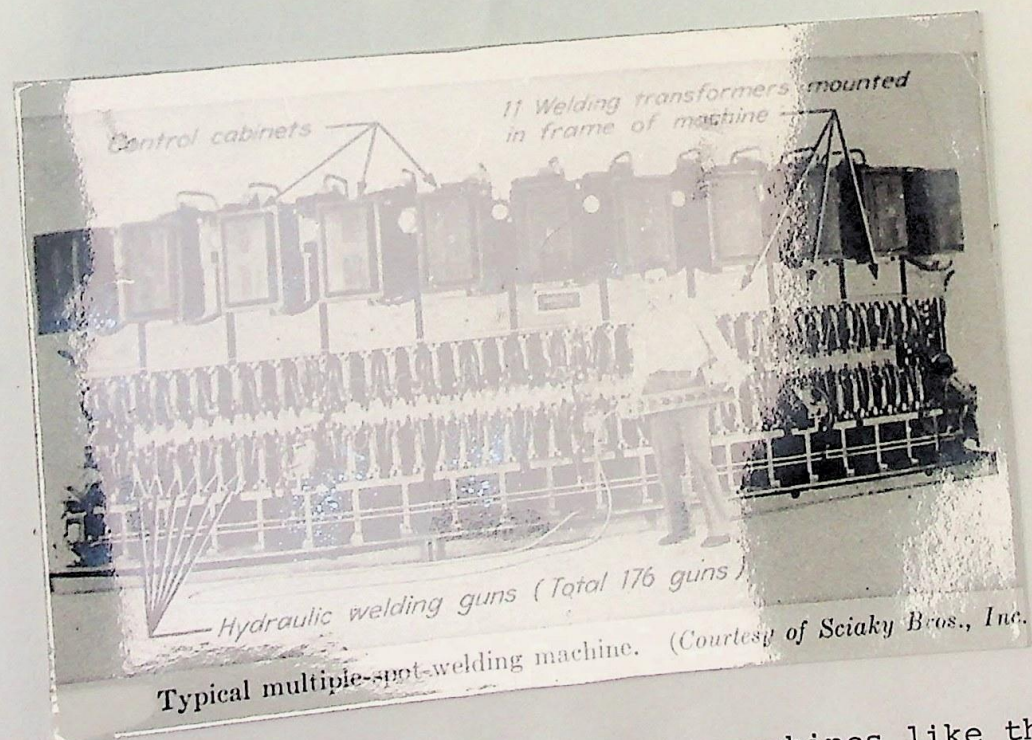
Large multiple-spot-welding machines like the one shown above were in use before 1950.
